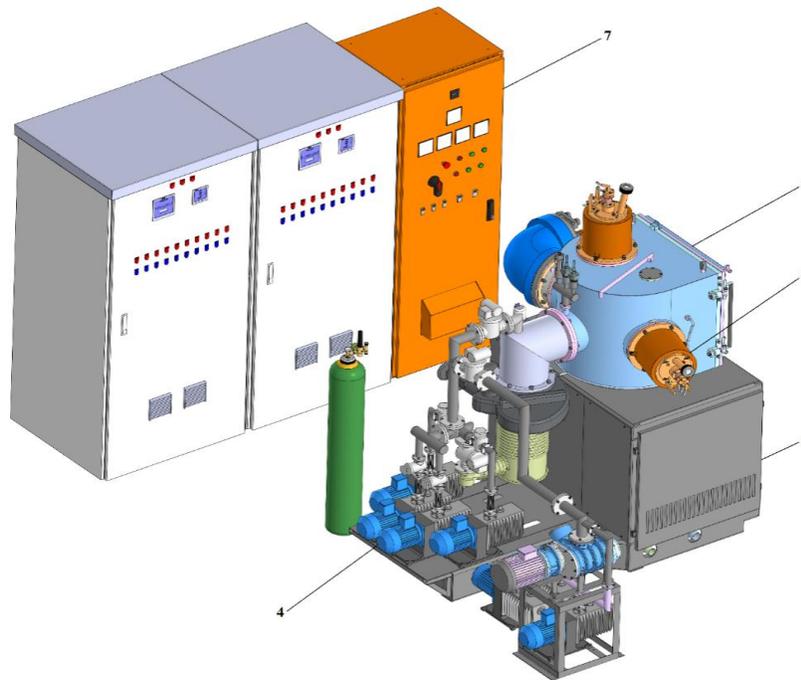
Plasma sputtering plant for applying multicomponent nanocomposite coatings (back view): 1 – vacuum chamber; 2 – plasmatron cathode-anode assembly and plasma separator unit; 3 – water cooling system; 4 – vacuum system; 5 – workbench rotation mechanism; 6 – machine stand; 7 – control and monitoring unit
